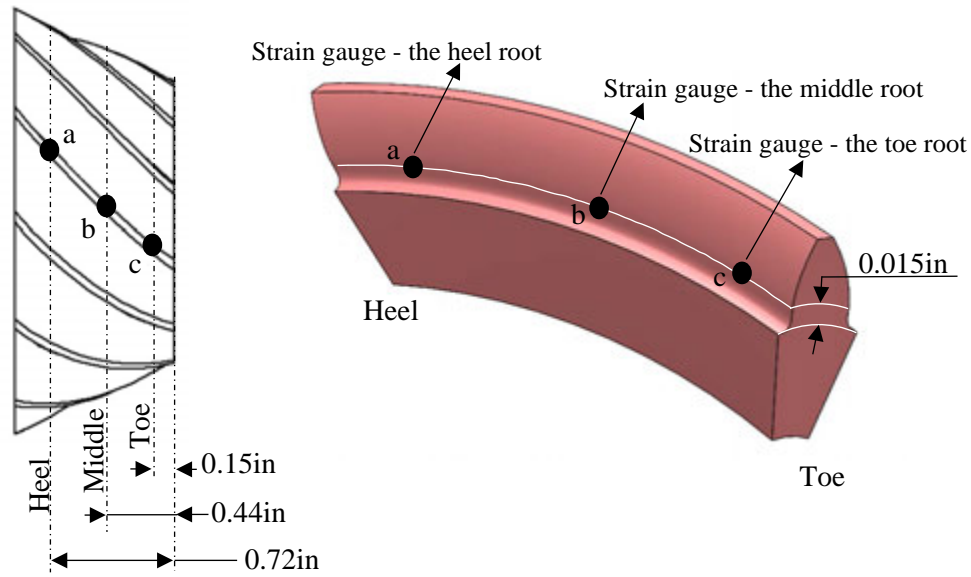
Strain gauge location on the successive tooth along the pinion fillet
